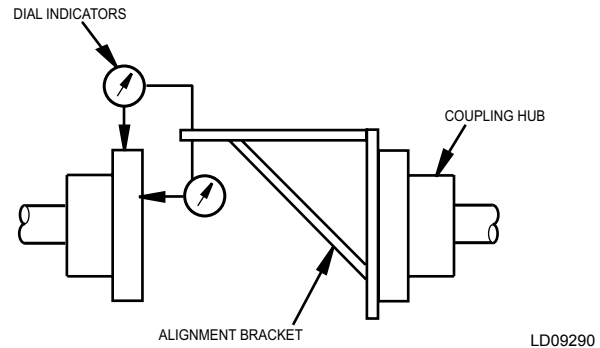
TYPICAL ARRANGEMENT FOR "FACE - O.D." READINGS TO DETERMINE COLD ALIGNMENT OF SHAFTS
